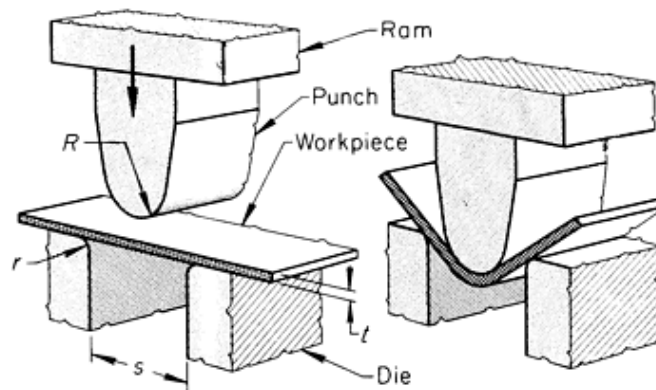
Typical setup for press-brake forming in a die with a vertical opening. R , punch radius; r , die radius; s , span width; t , metal thickness.
